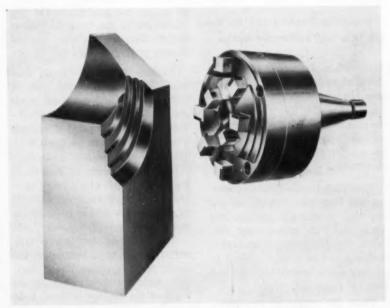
New tool (right) uses four pairs of indexable carbide wafers to take cuts in 1/8 in. steps, finishes the angle in one 15-minute pass.
